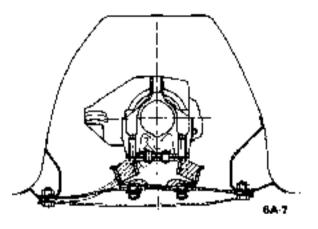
A-7 Transmission Support Bolts . Opel 1900 and Manta Series
